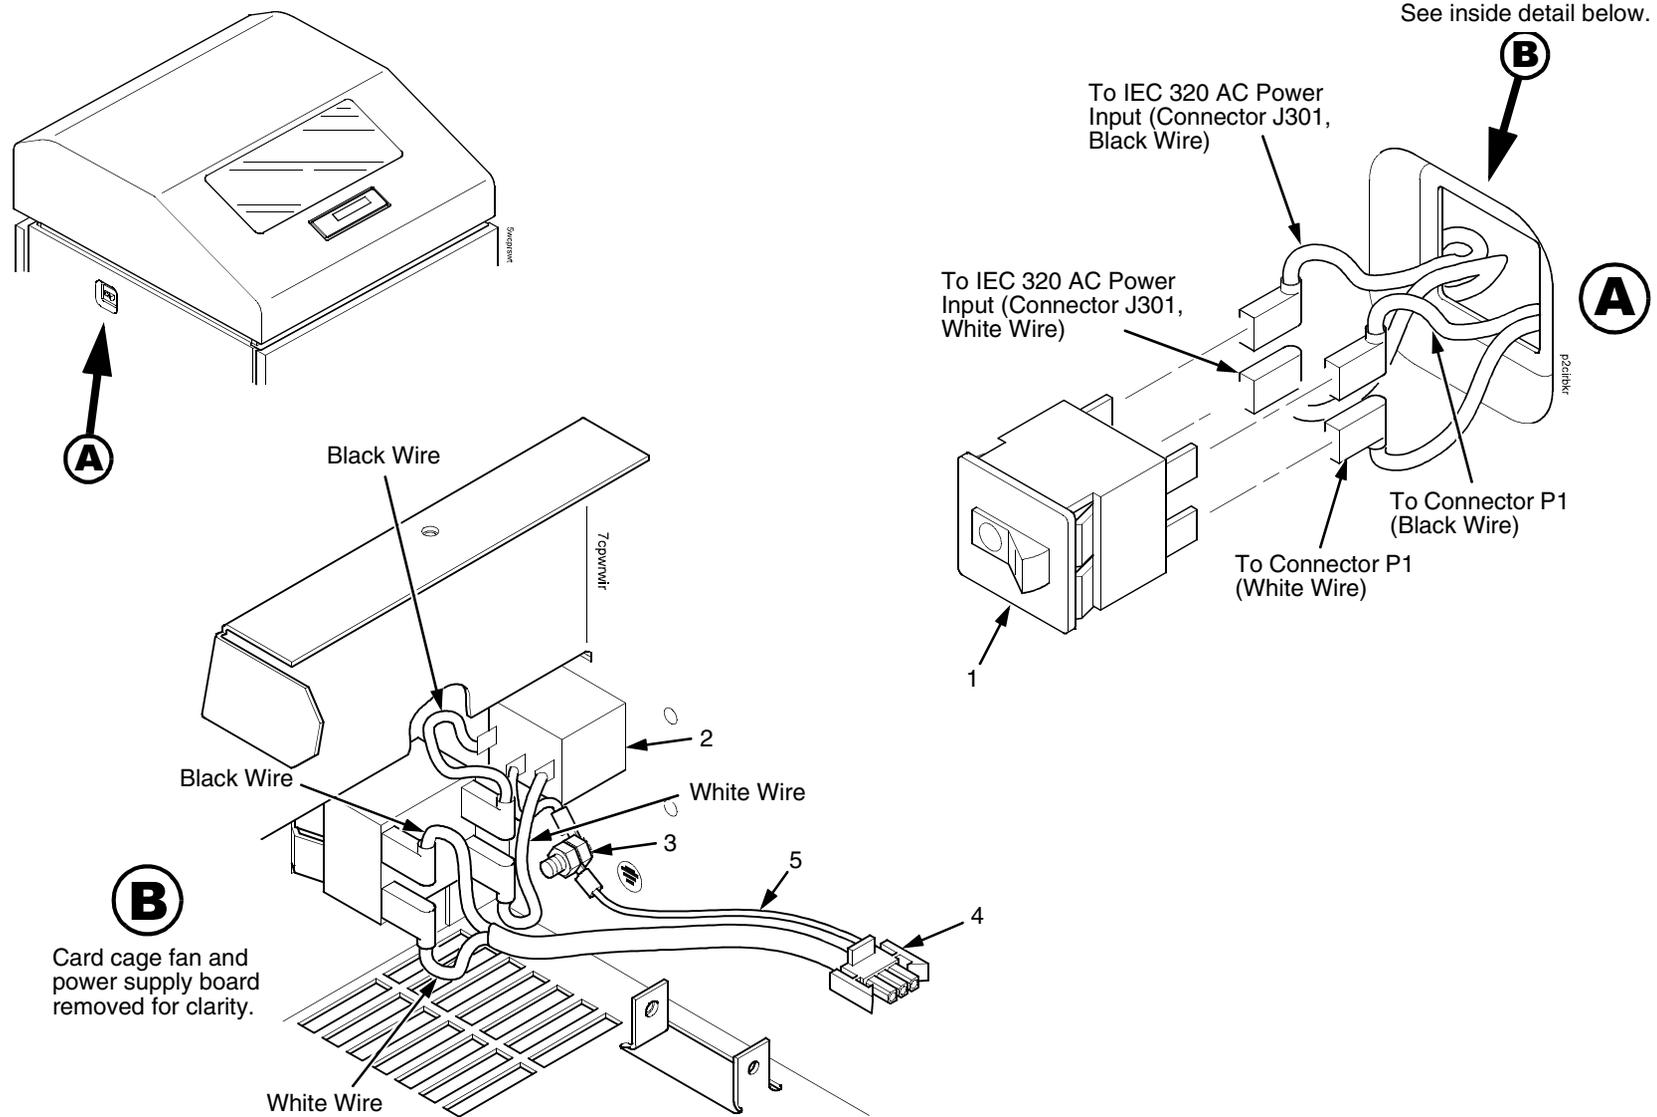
This illustrated parts breakdown shows the circuit breaker in cabinet models.
